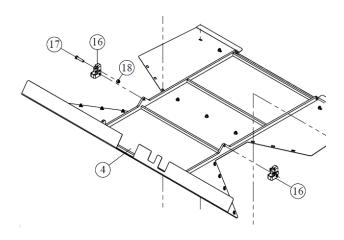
R450 Spacers Key 16 – Bracket, Extension Key 17 – Bolt ½ x 2-1/4 Key 18 – Nut ½ Nylock
